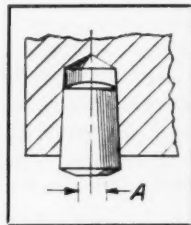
Design of short taper pin applicable as a foot or rest for a small drill jig.
